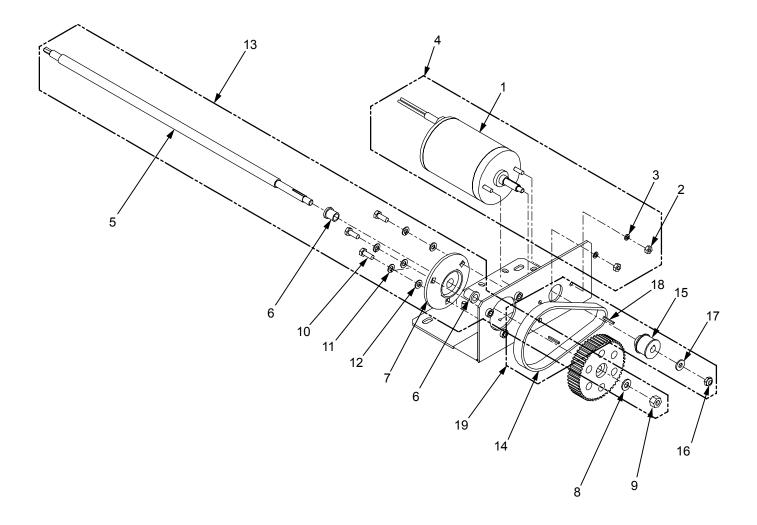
PF7000 SERIES DRIVE SYSTEM ASSEMBLY
